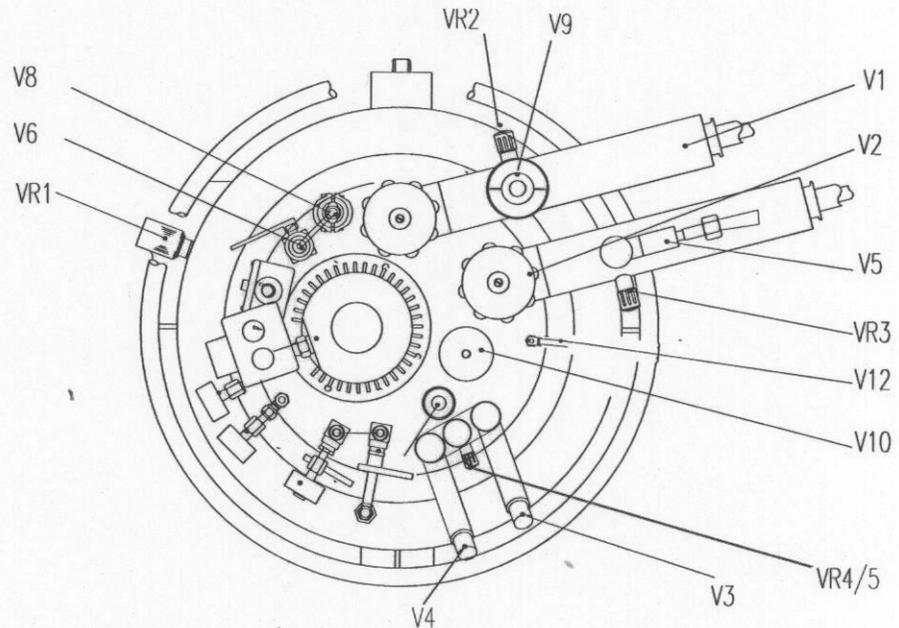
View of the Top Plate Showing the Position of the Valves
